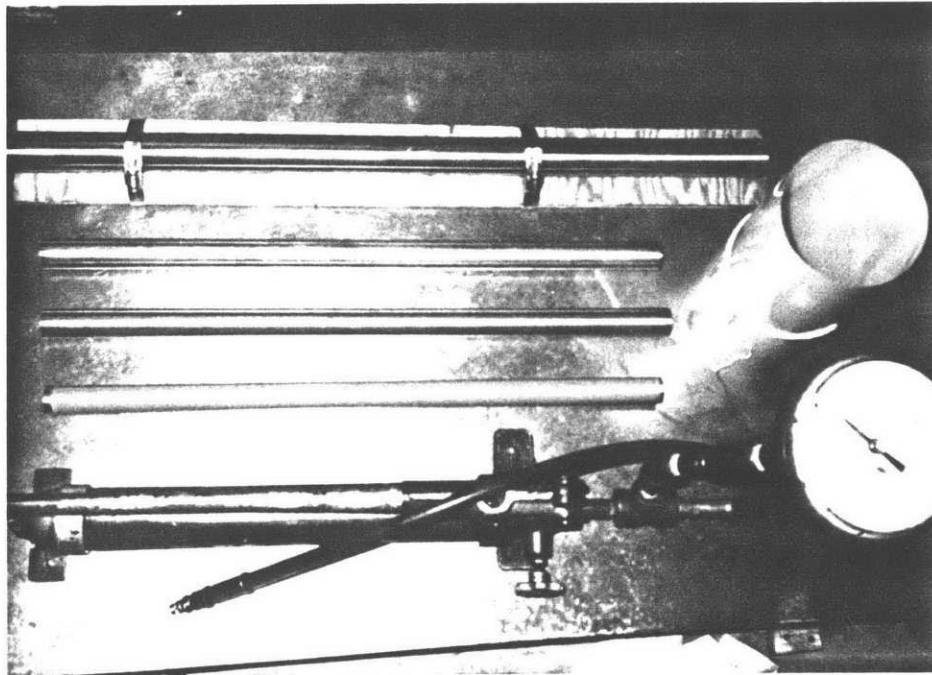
Photograph of tubes, mylar, and hydraulic pump used for the hydroforming process.
